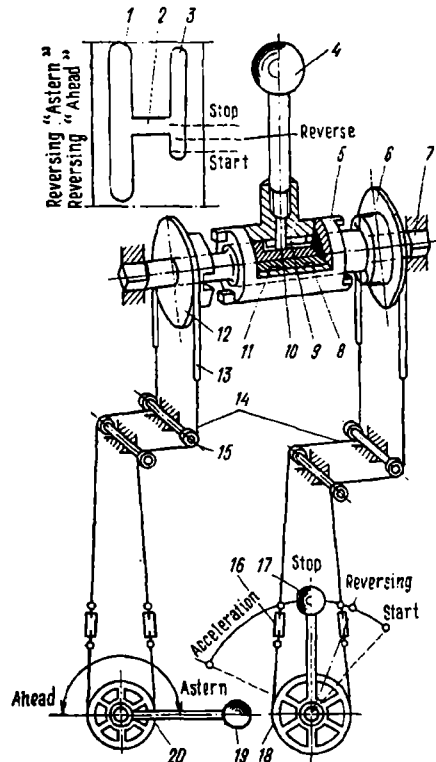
Schematic of reversing gear in 6NVD-48 diesel engine
